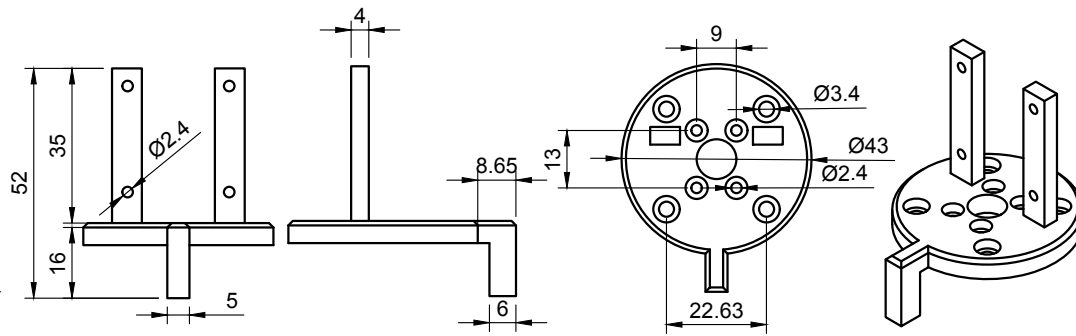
The mounting bracket for attaching the radar to the motor. All dimensions are in millimeters.
